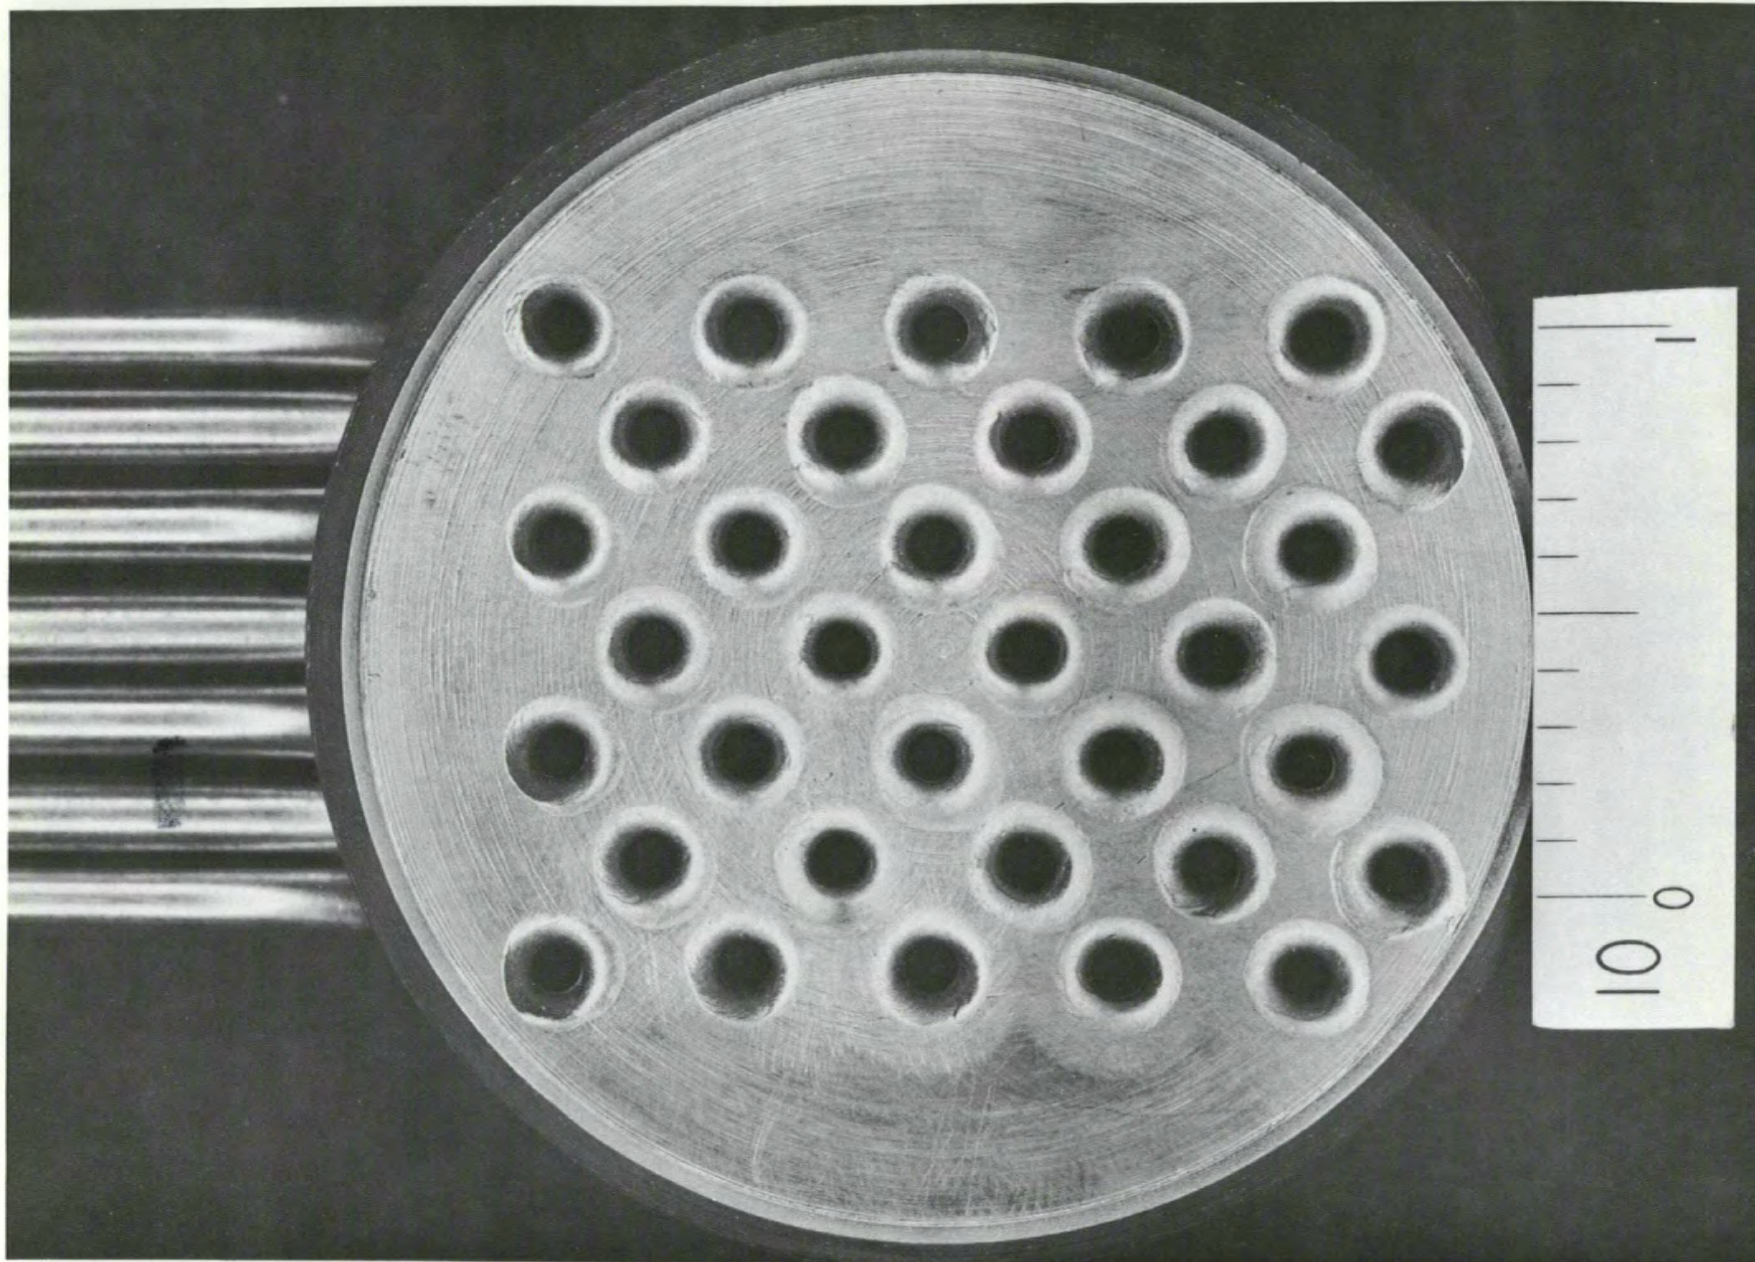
(Y-8894) Manual Inert-Arc Tube-to-Header Welds in One Header of the Heat Exchanger of Fig. 31. Unclassified.
